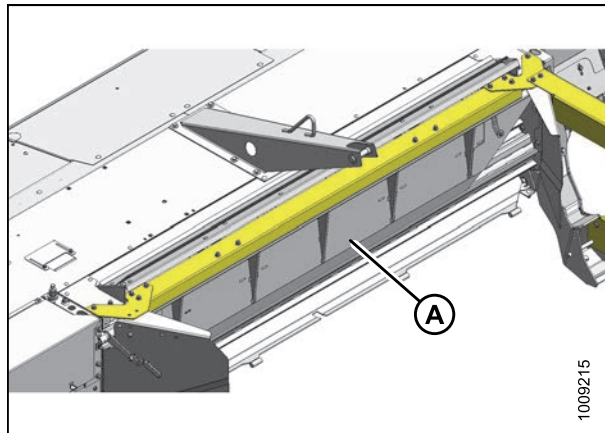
Shipping Stands (Left Side Shown – Right Side Opposite)
